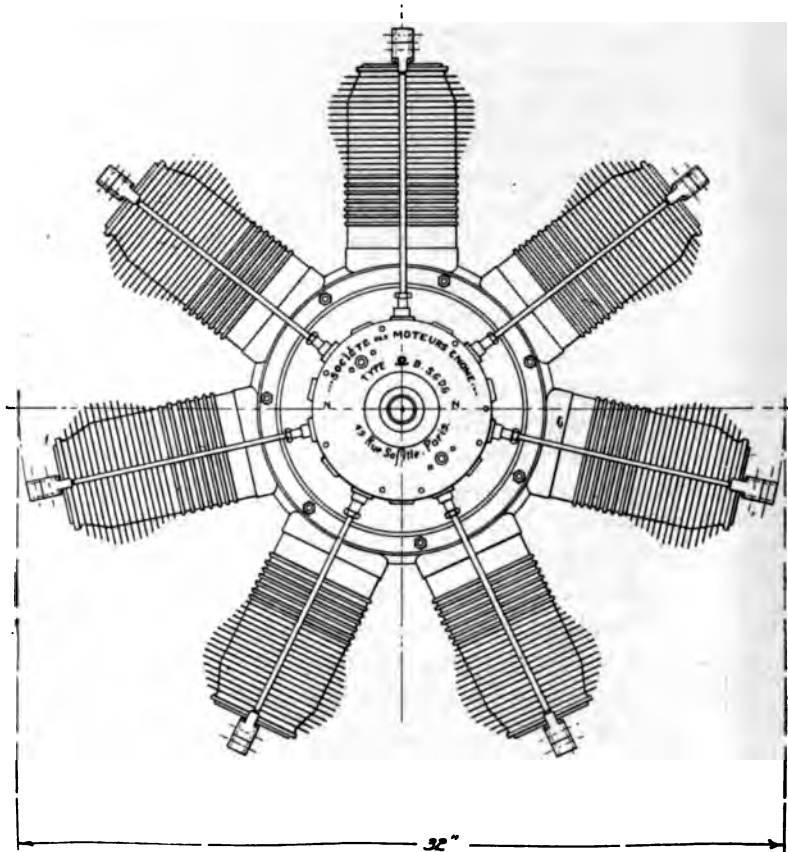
Detailed Side View of Seven-Cylinder Gnome Motor
